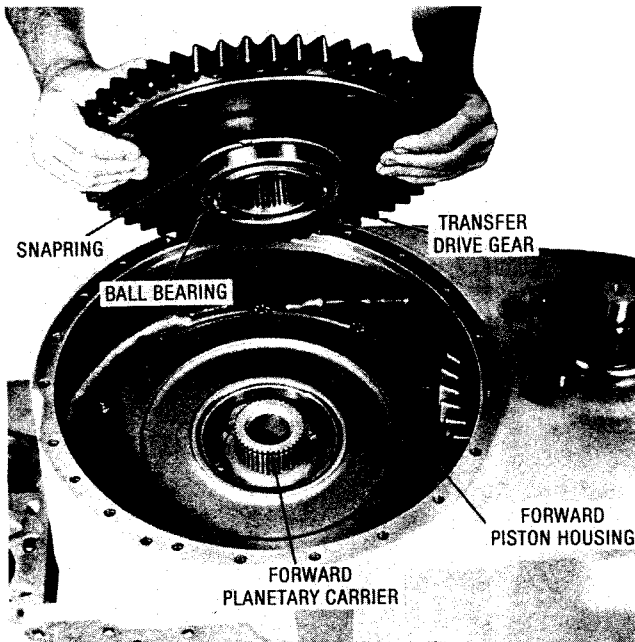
Installing transfer drive gear assembly (TT, TTB)
